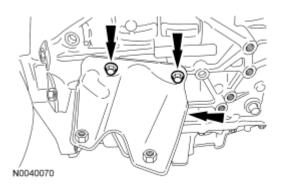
Locating Block Heater Courtesy of FORD MOTOR CO.
